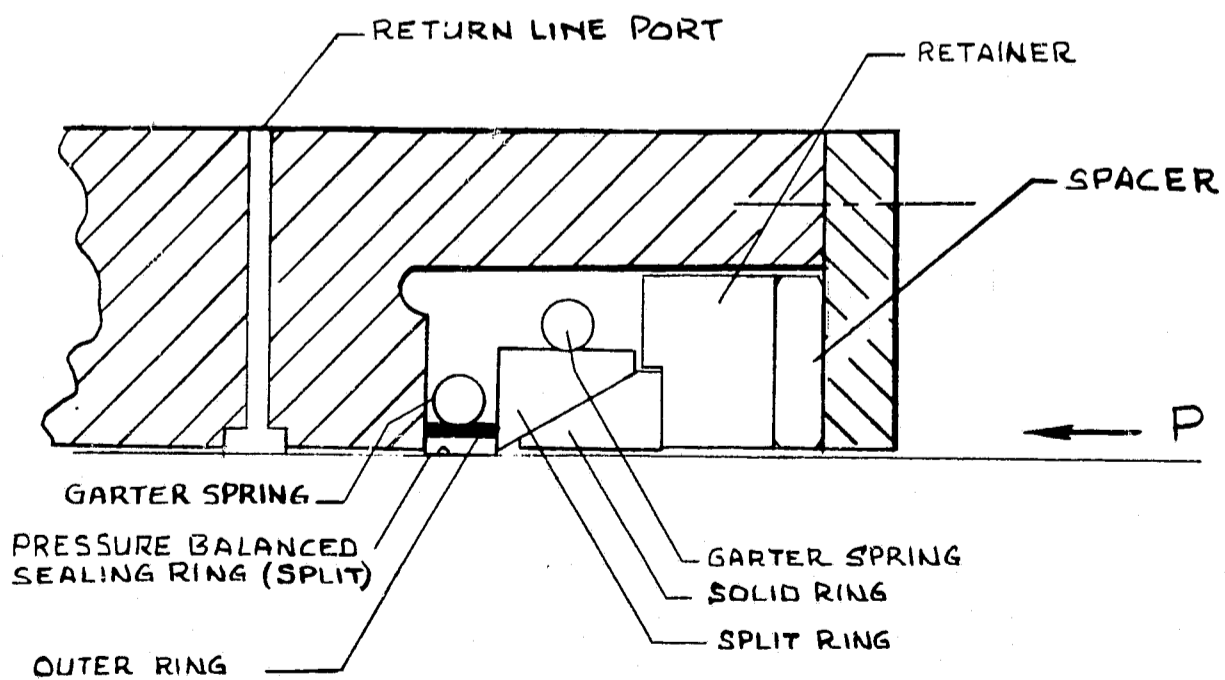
Pressure Balanced Sealing Ring with Axial Loading Rings
